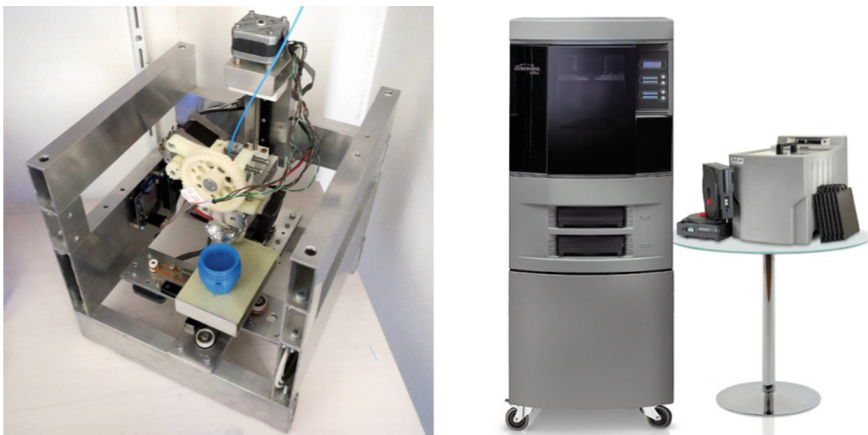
The low-cost assembled 3D printer (*left*) and the Stratasys® Dimension Elite 3D printer (*right*, image courtesy of Stratasys)
